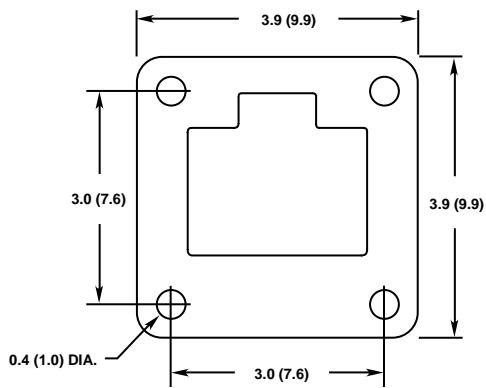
A—Q9001L Swivel Mount Dimensions in Inches (mm)
